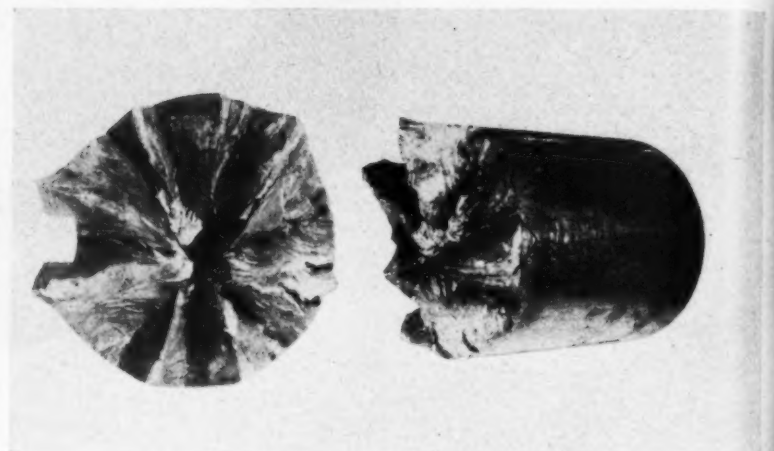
Below—Surface of this torsional fatigue fracture has been rubbed smooth, a characteristic appearance of transverse failures
